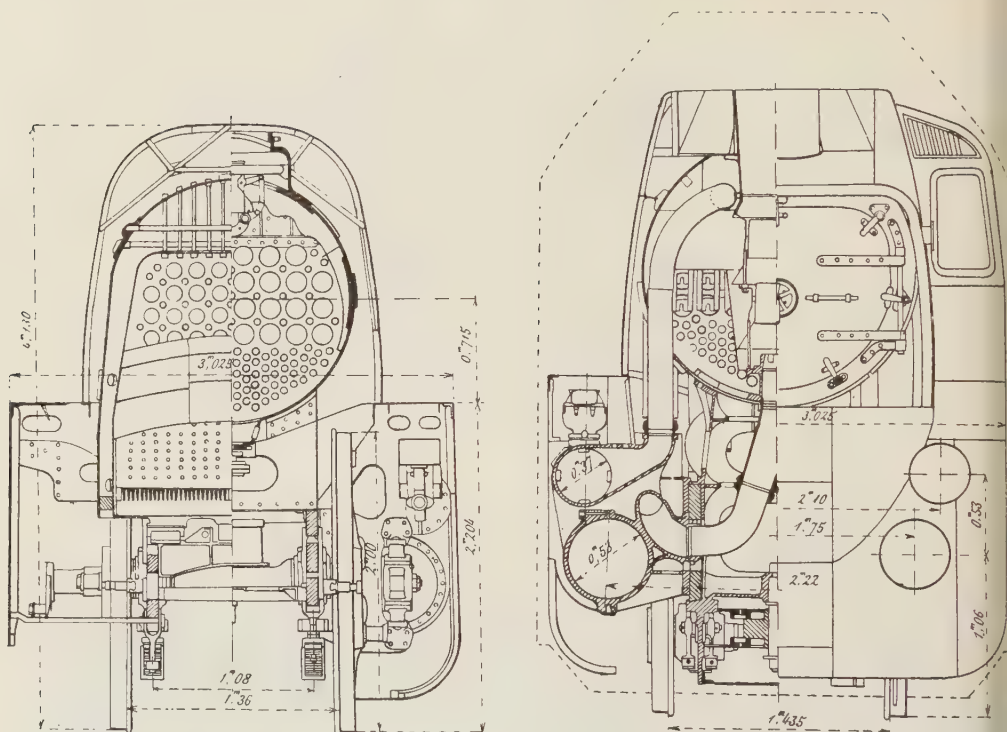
and 3. — Sectional elevation and sectional plan of the streamlined locomotive.
